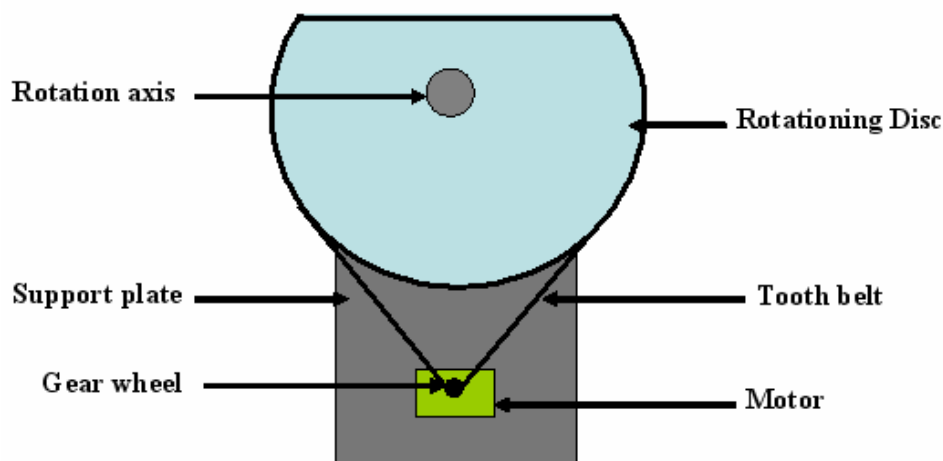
Schematic design of a gear motor with a tooth belt.
